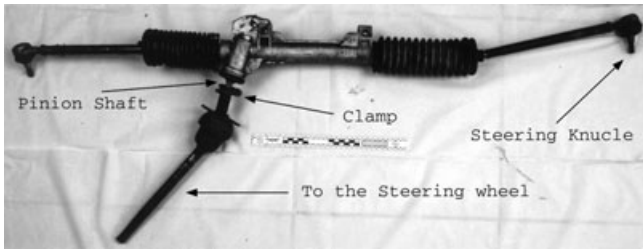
The steering system assembly. The edges knuckle of the steering rack that connect it to the front wheels. In the middle bar housing contains the pinion shaft that connected to the steering wheel.
